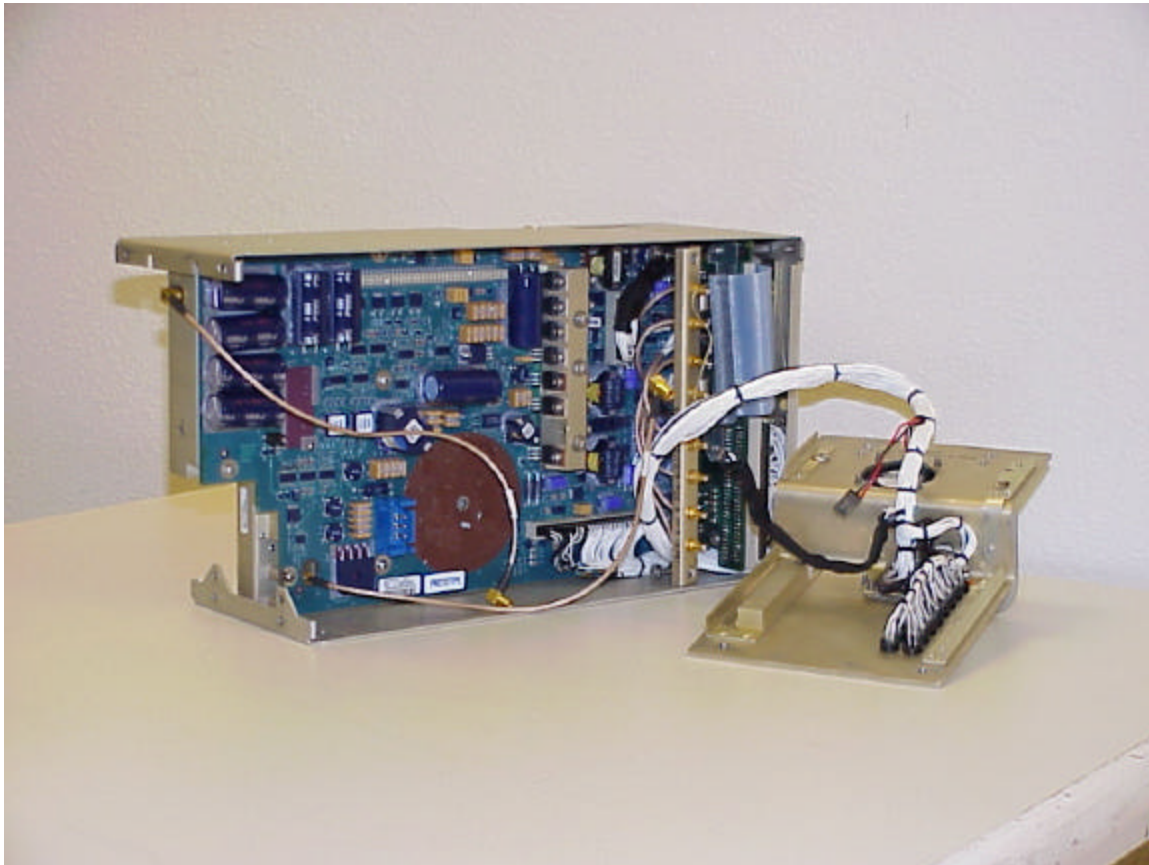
View of Unit Side, A5 Receiver and Front Panel Removed, Showing A4 Power Supply/Modulator Assembly
